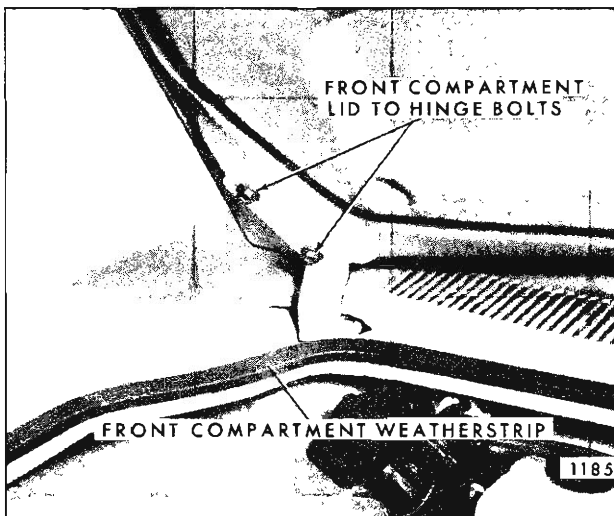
C16—Front Compartment Weatherstrip and Front Compartment Lid Attaching Bolt
